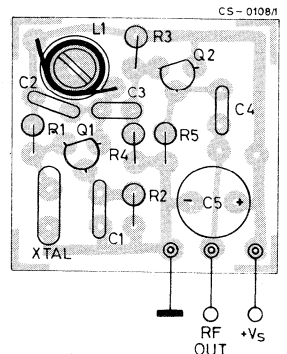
PC board component layout of the crystal oscillator circuit (1:1 scale)
